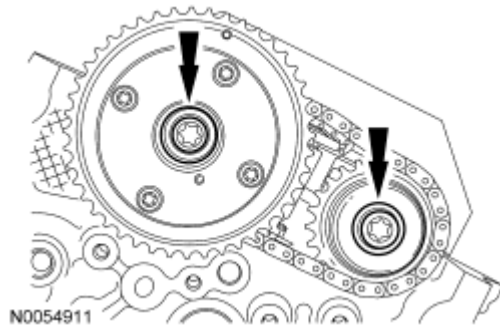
Locating LH VCT Assembly Bolt & LH Exhaust Camshaft Sprocket Bolt
